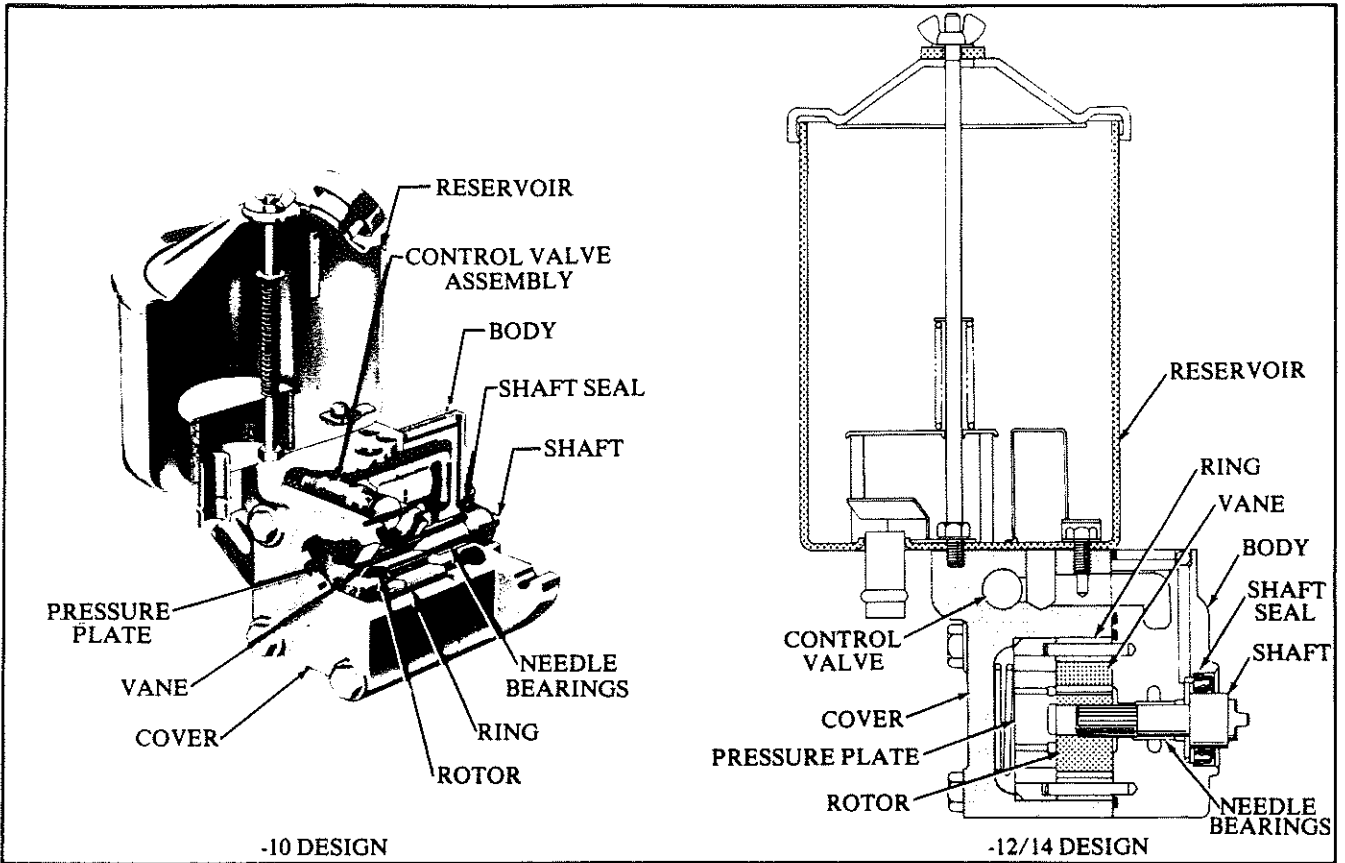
VTM28 Pump - Cutaway and Sectional Views
